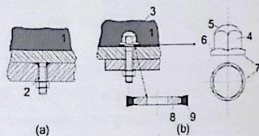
(a) To prevent crevices at the product side (1), screws, pins or a stud welded on the non-product side (2) should be used. (b) A bold head (3) that is hexagonal (4), domed (5) and provided with a sloped circular collar (6, 7) is easily cleanable, and the metal-backed (8) elastomer gasket (9) is used to seal the thread (Lelieveld et al., 2003; Hauser et al., 2004b).
